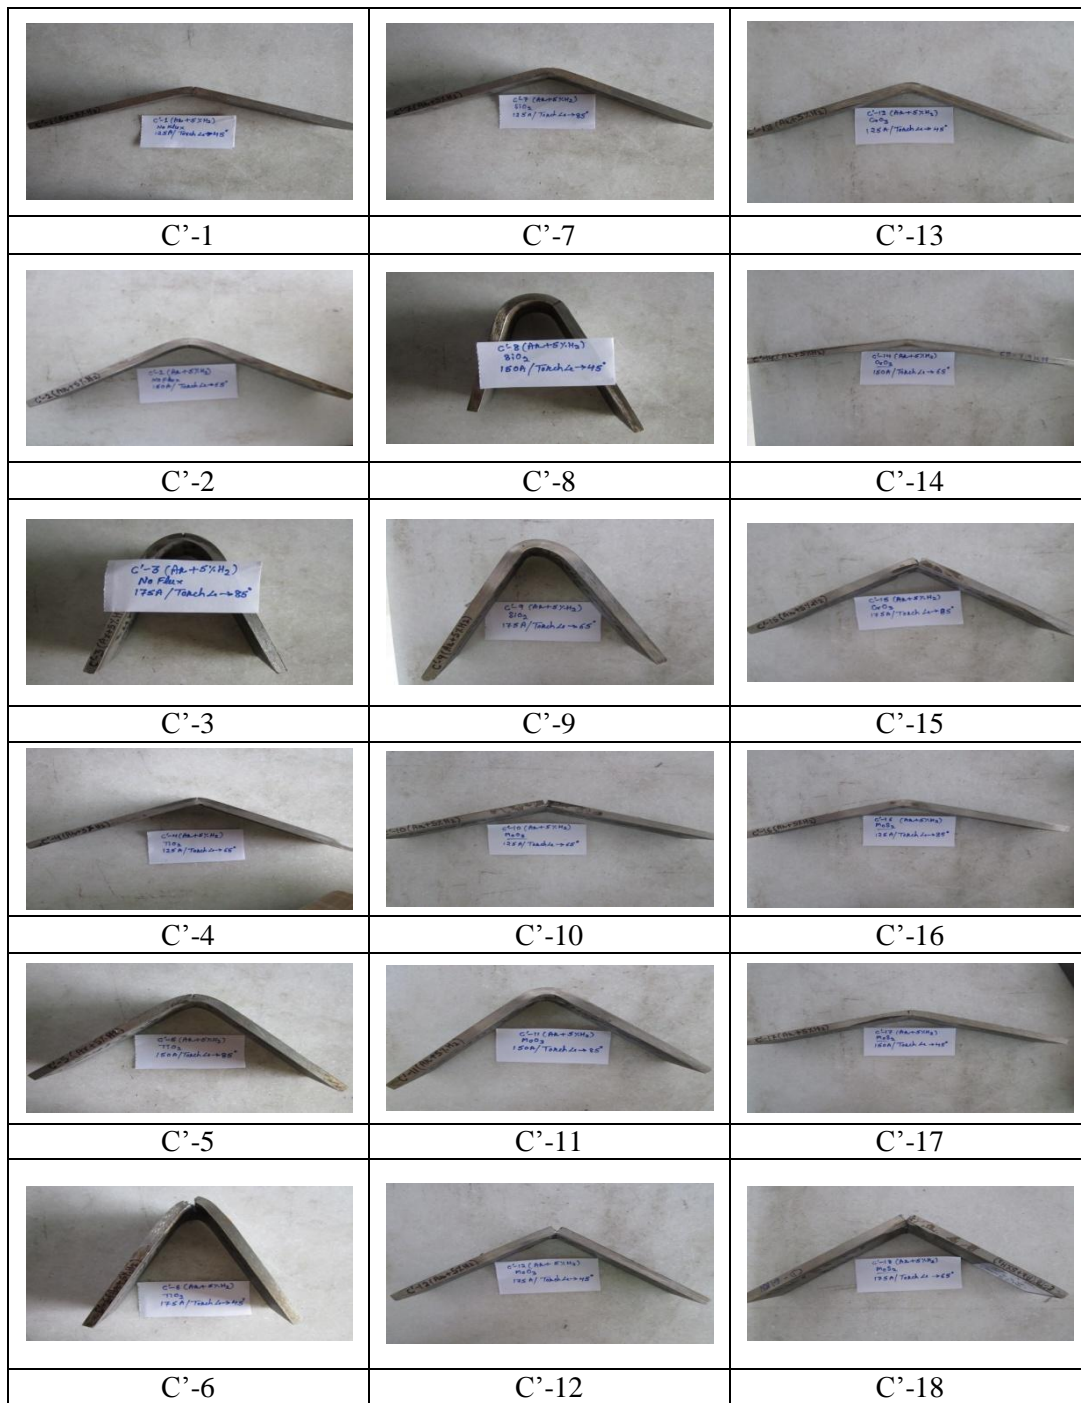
Front view of bend test specimen of A-TIG welding of AISI 304 under Ar+H₂ shielding
